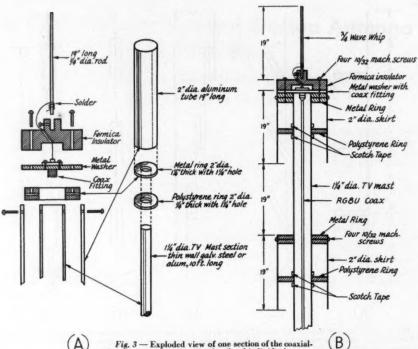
Exploded view of one section of the coaxialdipole array at A, showing details of individual parts. Assembled view, B, shows how the parts go together.
